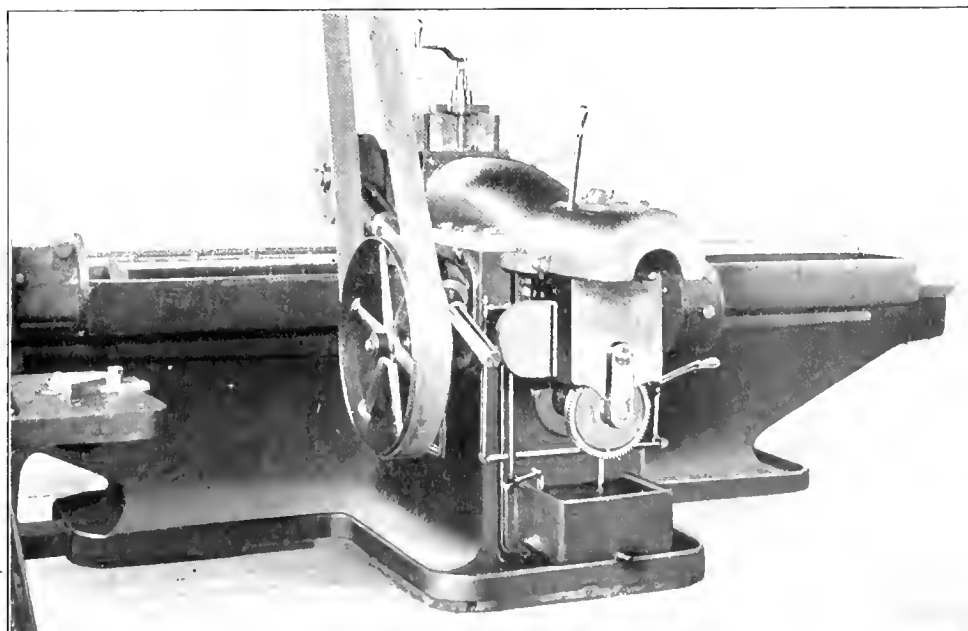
Rear View of Rack-cutter, showing Driving Mechanism.
